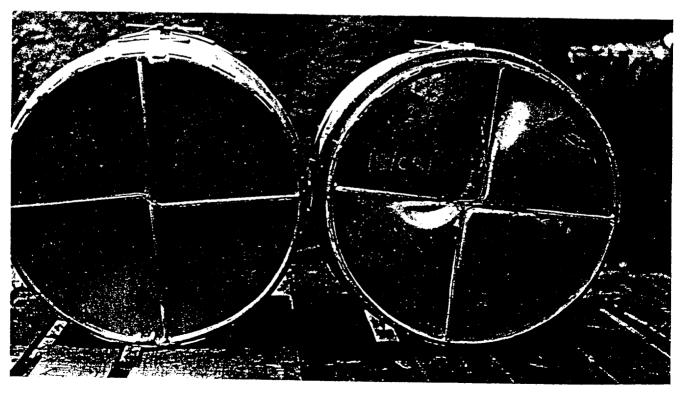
1863/10 - Damage to assembly C compared with undamaged drum
